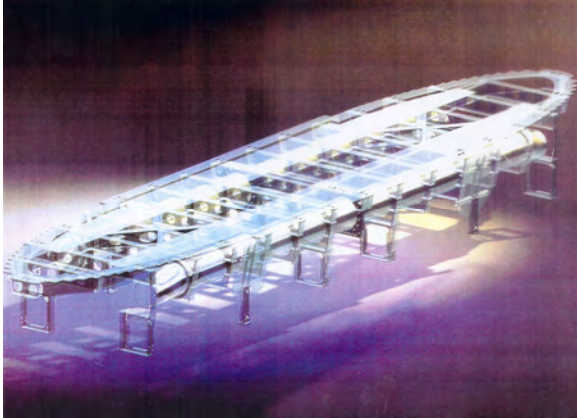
CAD-CAM Drawing of Aluminum Chassis for 60 Foot Long Maglev-2000 Vehicle
